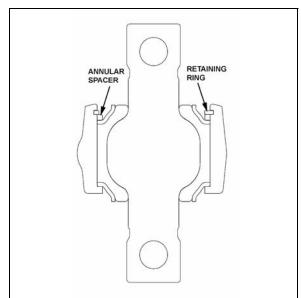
LOWER A-ARM BALL JOINTS 16047
